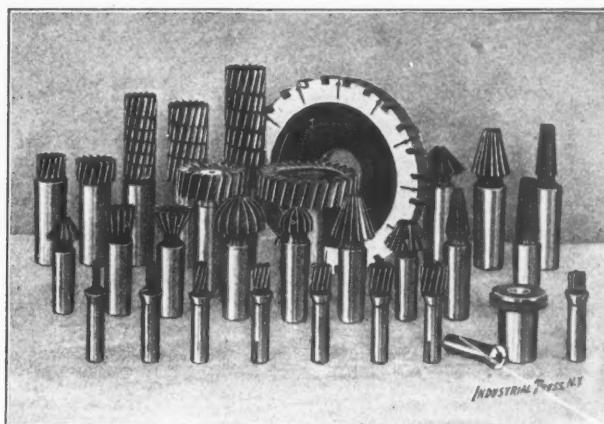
Set of Cutters for No. 6 Vertical Milling Machine.
